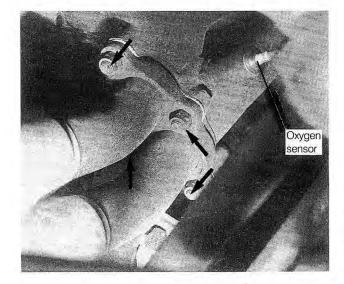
Front pipe to exhaust manifold mounting nuts (arrows) and oxygen sensor.
